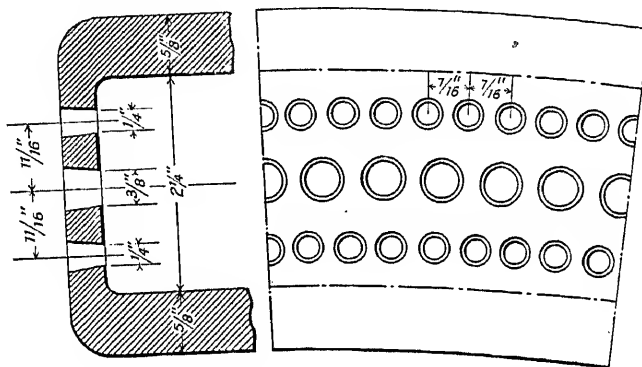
DETAILS OF HOLES IN BUBBLER (DR. CARPENTER'S DESIGN).
